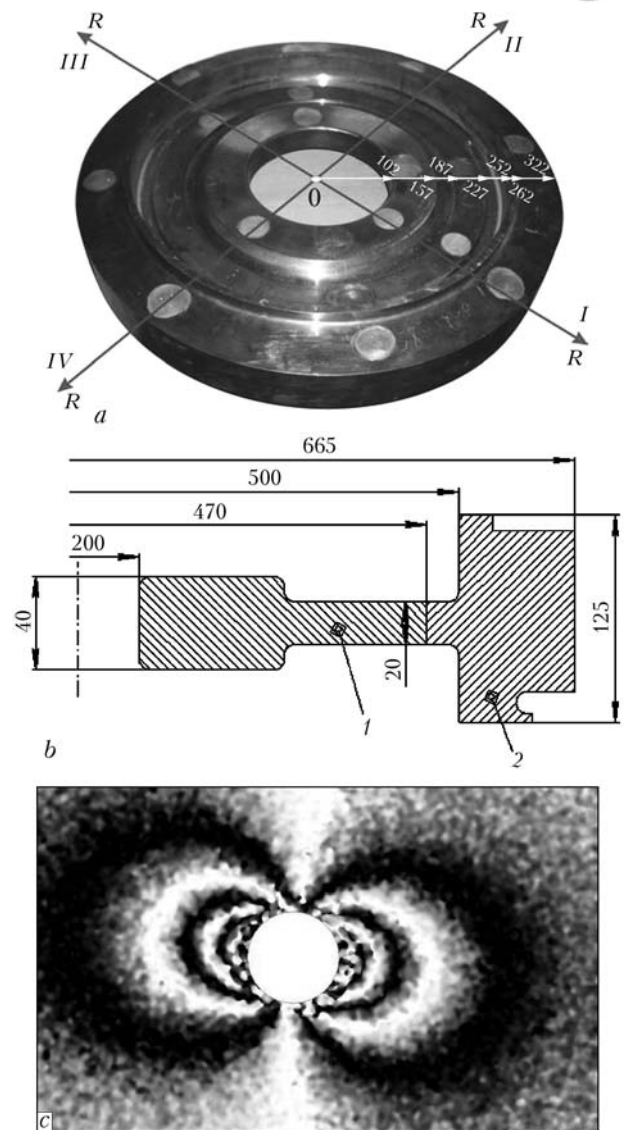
General view (*a*) and geometric sizes (*b*) of gas turbine engine rotor disc and typical pattern of interference fringes around the drilled hole (*c*): 1 – hub; 2 – rim
